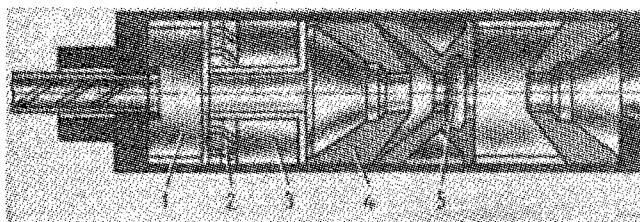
Multichamber cylindrical silencer with a coolant filler: 1. Wire network 2. Ports in barrel 3. Container 4. Interchamber inserts 5. Threaded nut
